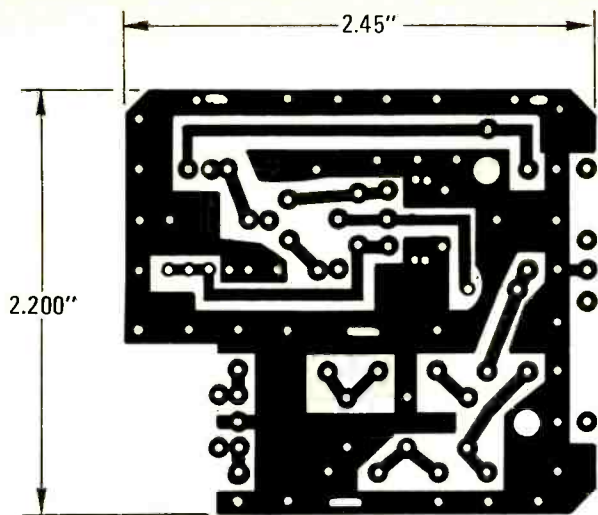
FOIL PATTERN of component side of double-sided main board shown actual size.
